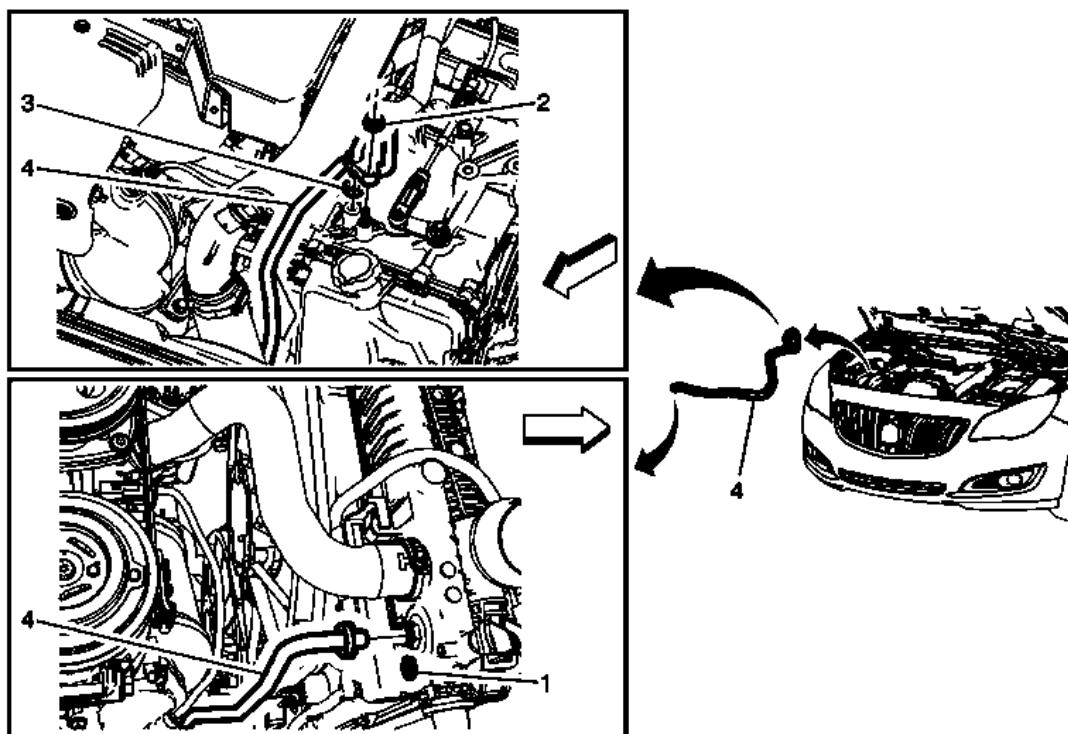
Transmission Fluid Cooler Inlet Pipe (M7U)
